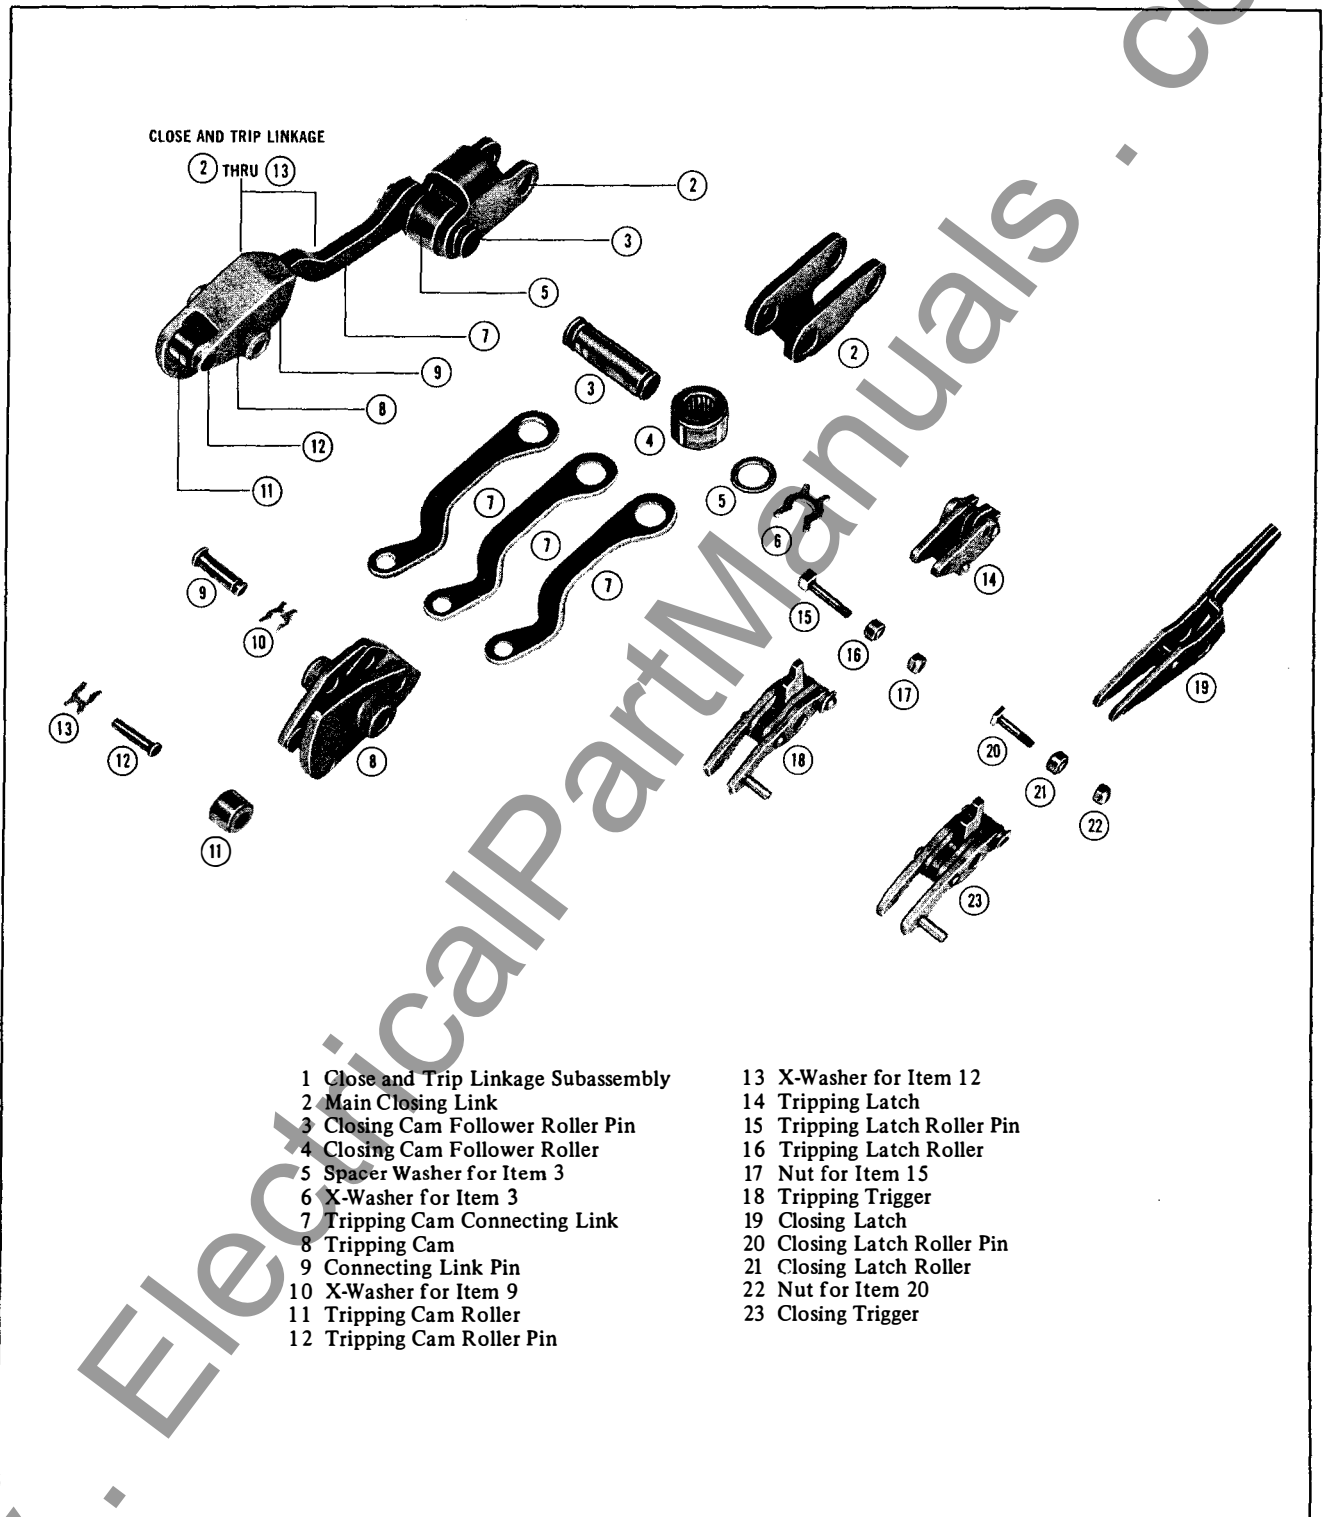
Stored Energy Mechanism – DVP Breaker: Parts for Close and Trip Linkage Subassembly (381961)
